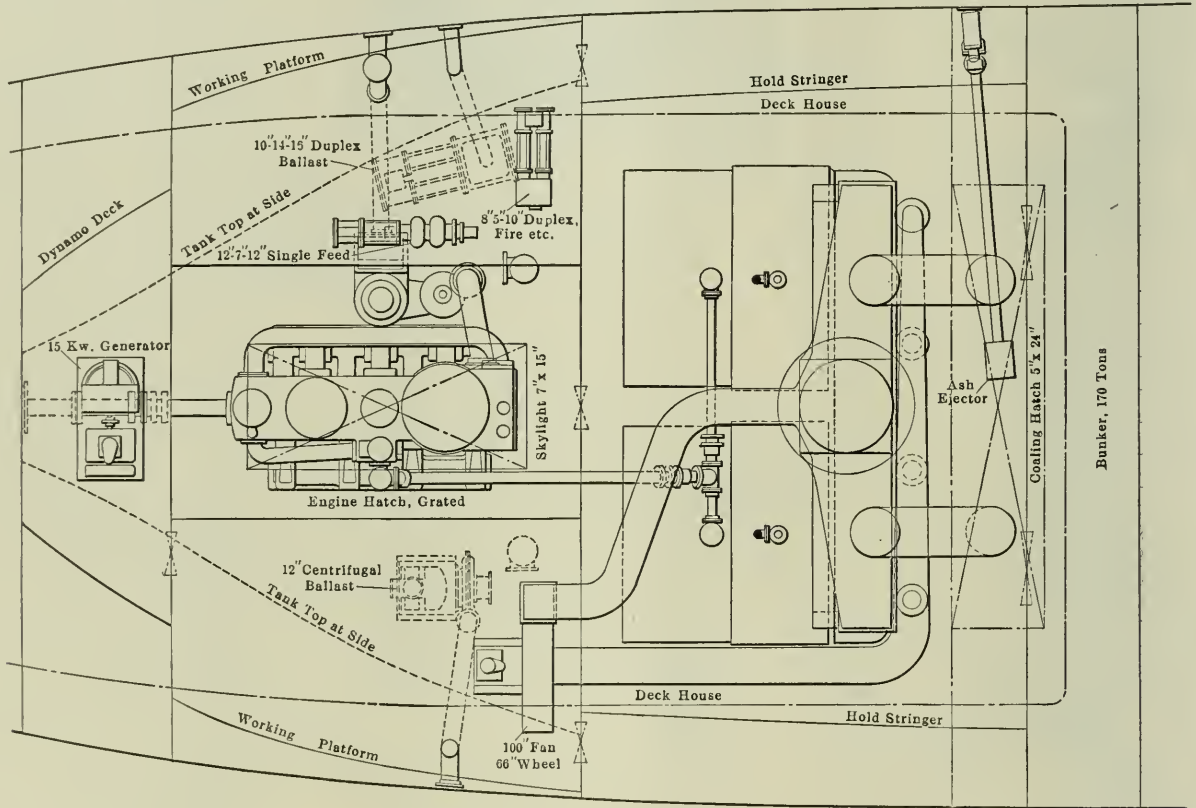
FIG. I. PLAN AND ELEVATION OF 1000-HORSEPOWER STEAM-POWER EQUIPMENT INSTALLED IN LAKE FREIGHTER
